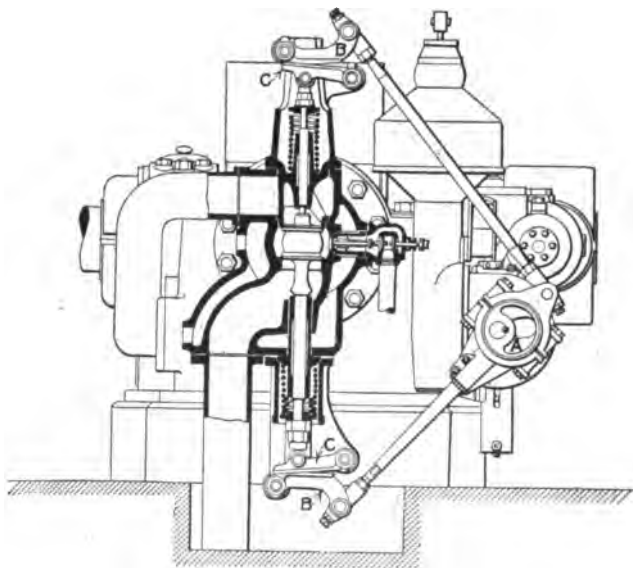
Allis-Chalmers Diesel valves and rockers.
